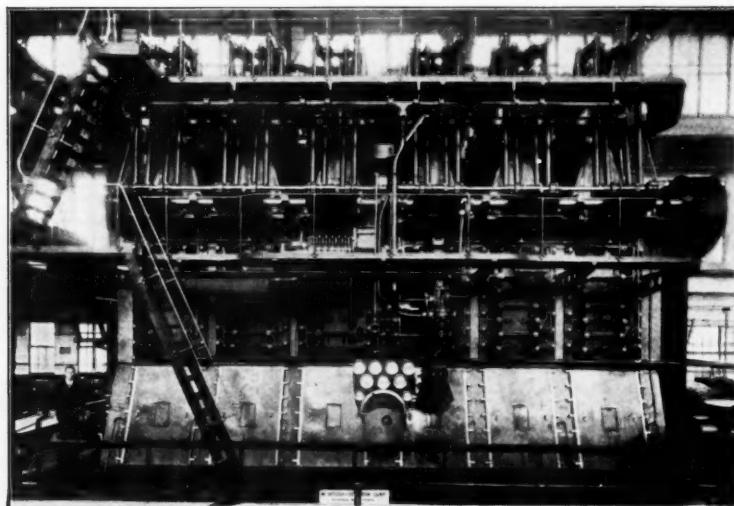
Side view of a 2700 B. H. P. four-cycle, single acting Diesel engine. This engine is force-feed lubricated throughout.
